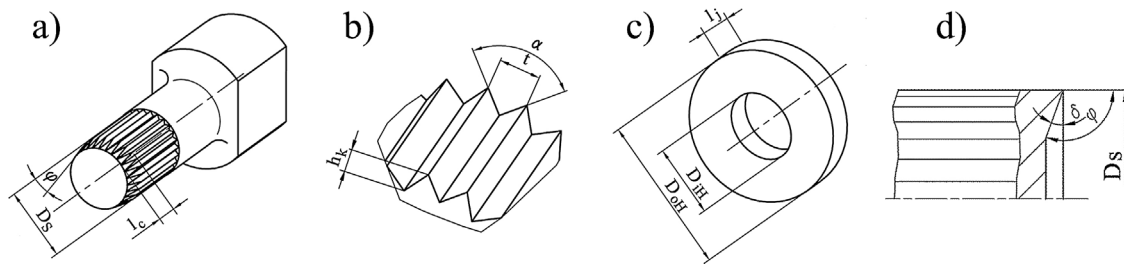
Design parameter of knurled interference fits: (a) shaft, (b) knurl detail, (c) hub and (d) cutting edge of the shaft.
